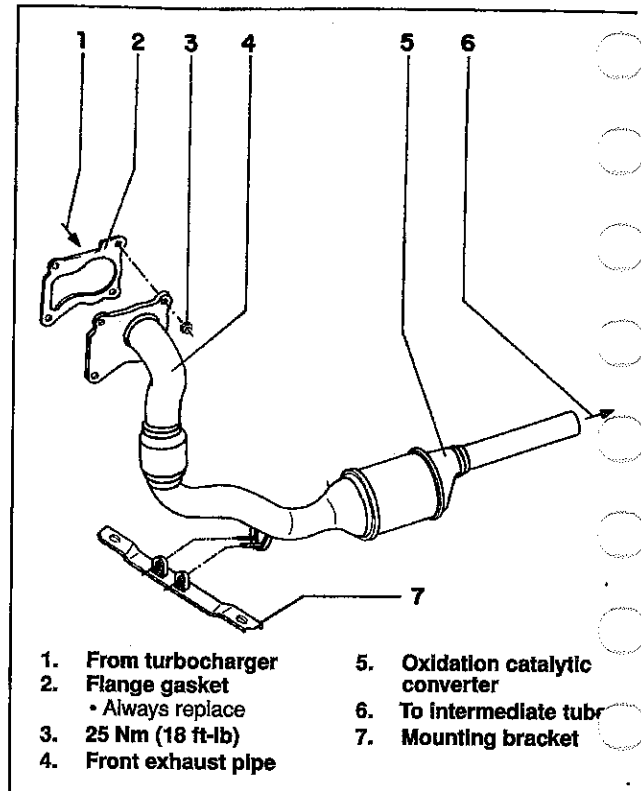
Front section of exhaust system for AHU (1.9 liter) 4-cylinder TDI diesel.
